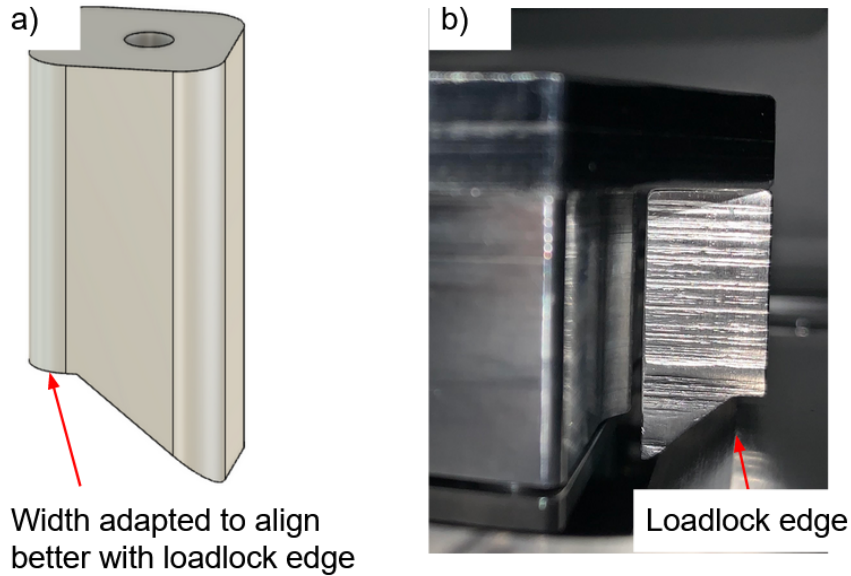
The width of the horizontal part of the legs (indicated in a)) was adapted to align closely with the XPS loadlock edge (indicated in b)).
